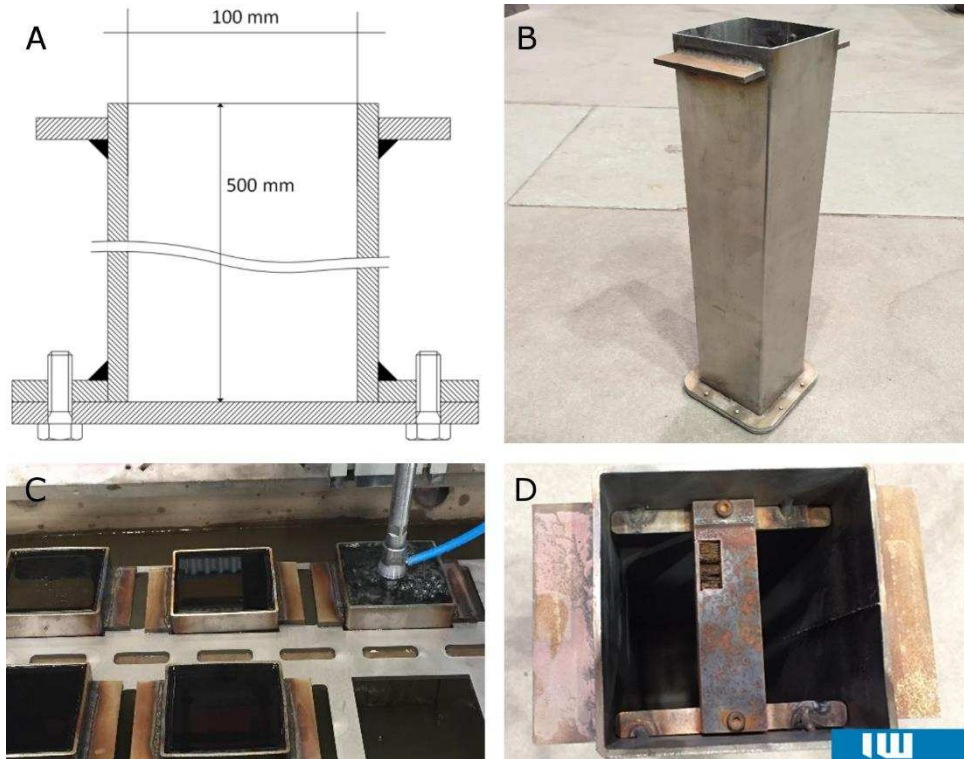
Abrasive collecting vessel (A-B), Jetting experiment with mounted vessels (C), mounted specimen for cutting experiments (D)
